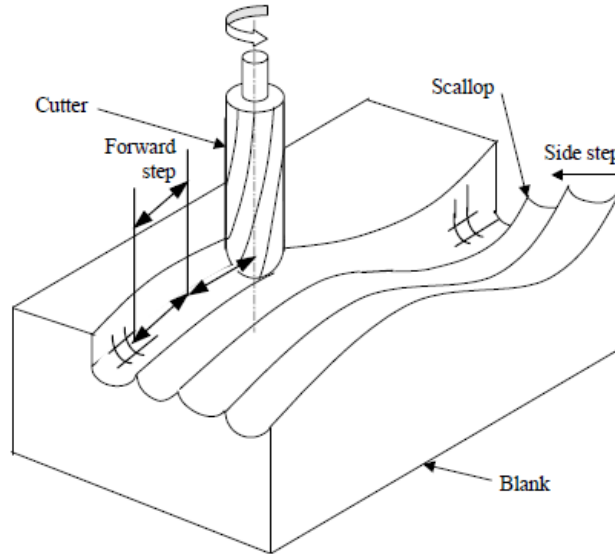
Sculptured Surface Machining Using Ball End Mill Cutter. Giri Et Al. [2005]
